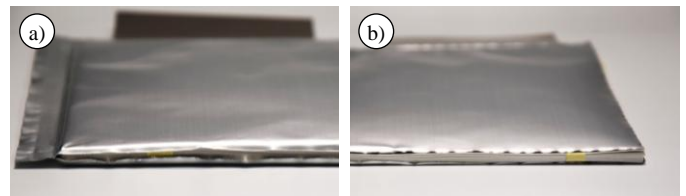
Pouch cell cut open on: a) the shear and b) the ultrasonic cutting test stand.
